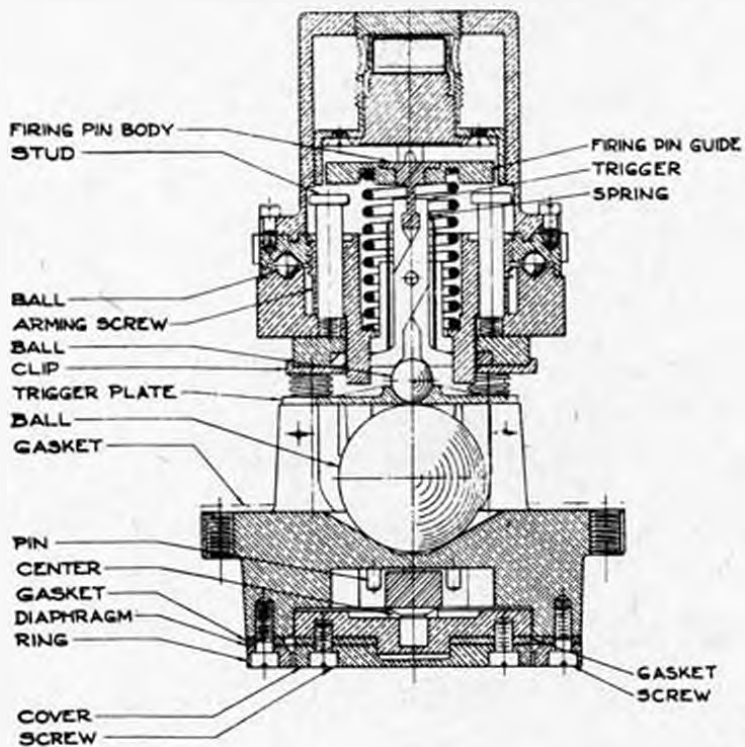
Mk. 3 Type Exploder, Unarmed
